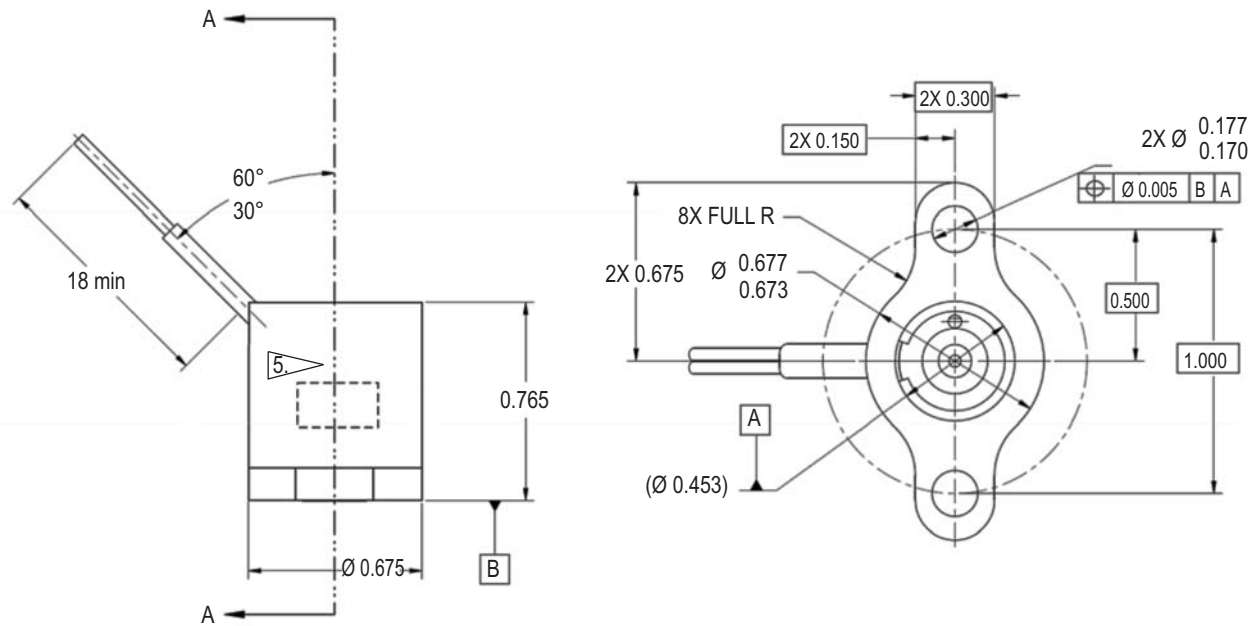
Drawings of the long-lifetime PGV showing (a) a profile view of the overall valve and (b) a view from the bottom.
